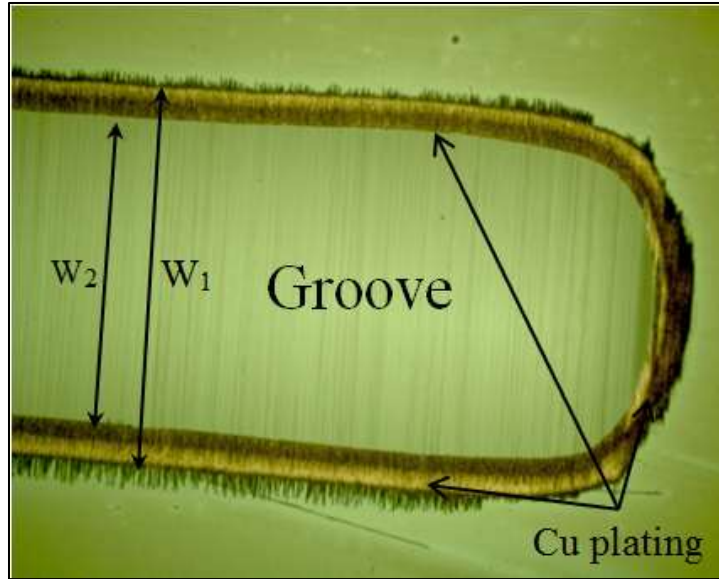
Inspection (top-view) of Cu plating on groove after stain exposed and rinsed.
